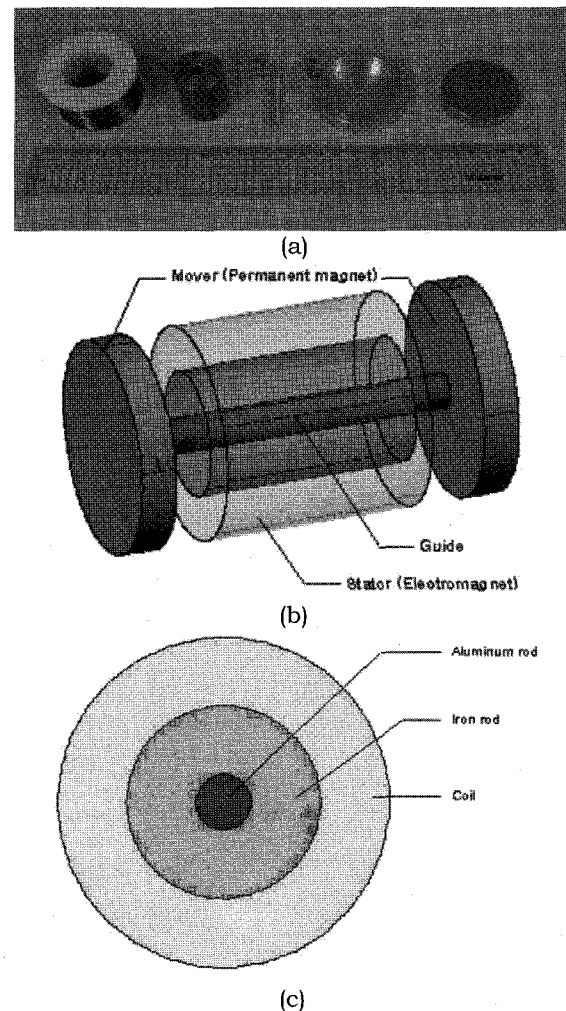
(a) Disassembled view of the actuator. (b) Assembled view of the actuator. It consists of three parts: stator, mover and guide. (c) Sectional view of the stator. It consists of aluminum rod, iron rod, and coil.
